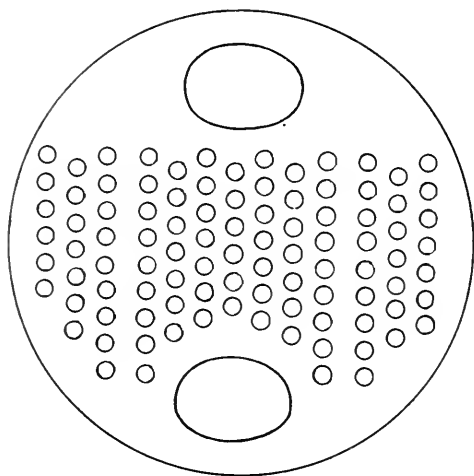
HEXAGONAL ARRANGEMENT OF TUBES IN H.R.T. BOILER
